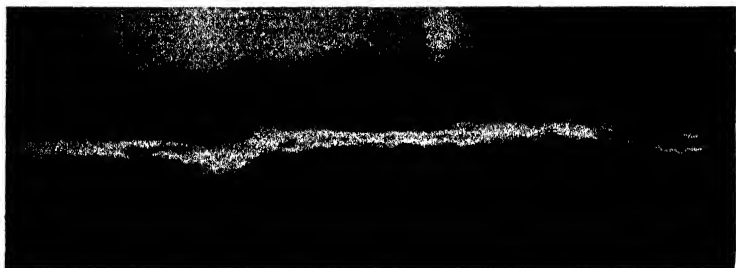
X-ray photograph of a boiler weld showing a contraction crack
